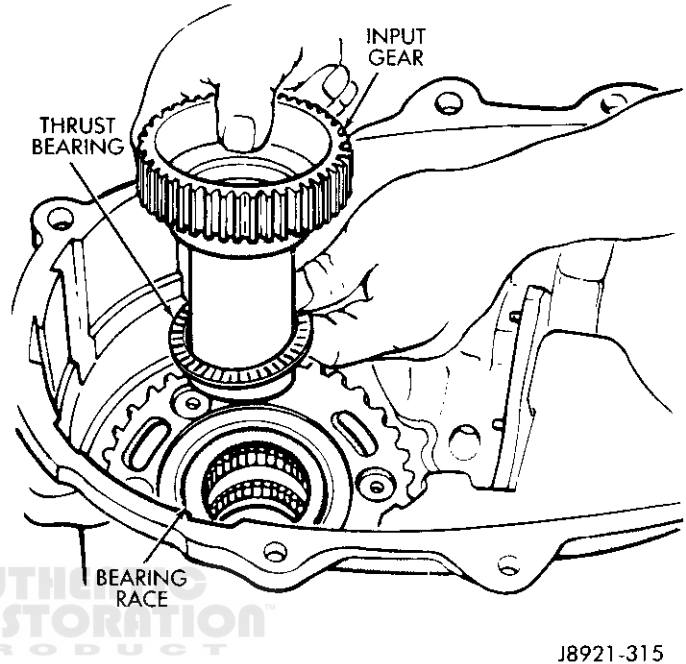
Removing Input Gear, Thrust Bearing And Race
